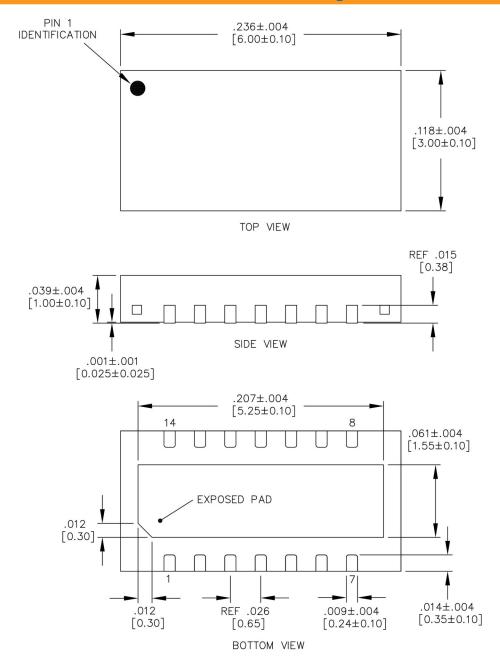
DFN3X6-14 Plastic Package Dimensions (all dimensions in inches [millimeters])
